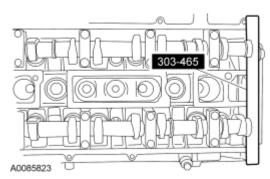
Identifying Special Camshaft Tool (303-465) Courtesy of FORD MOTOR CO.
